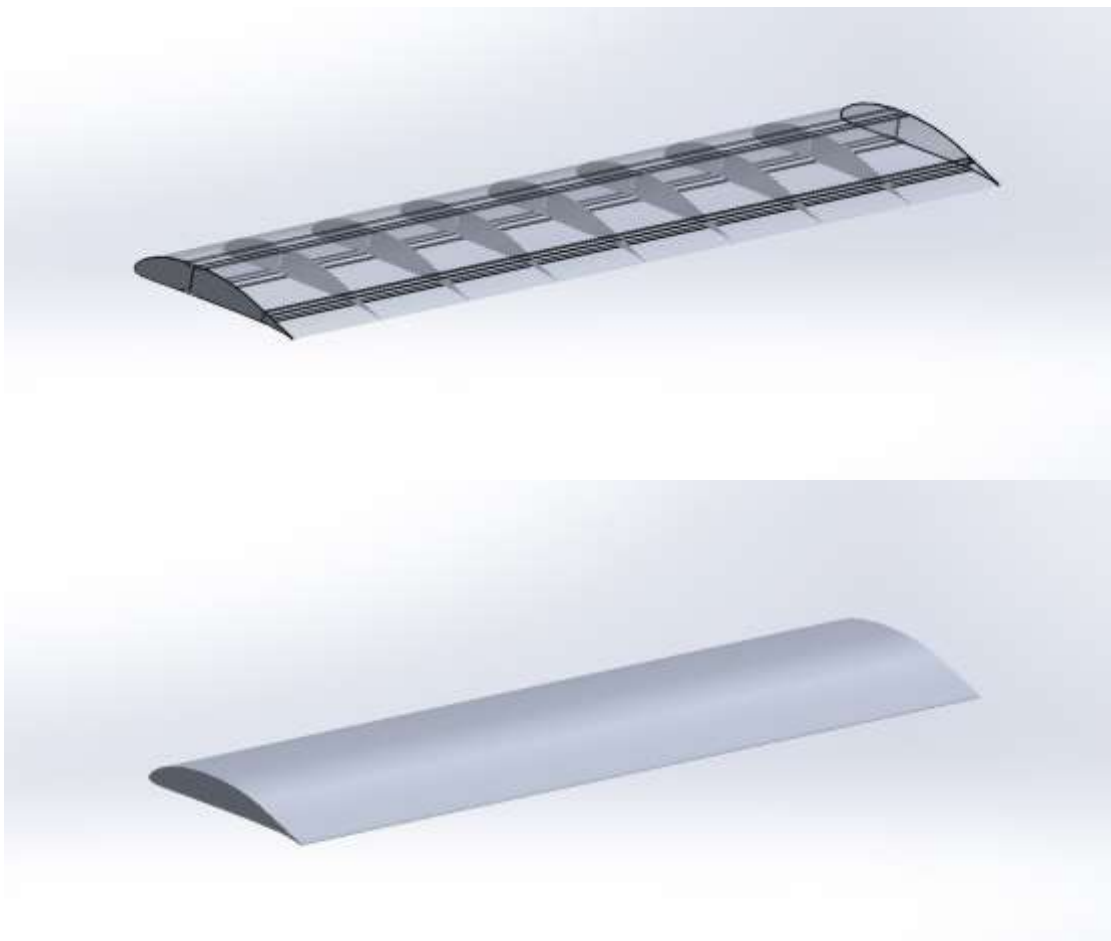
CAD model of wing structure designed using SOLIDWORKS
